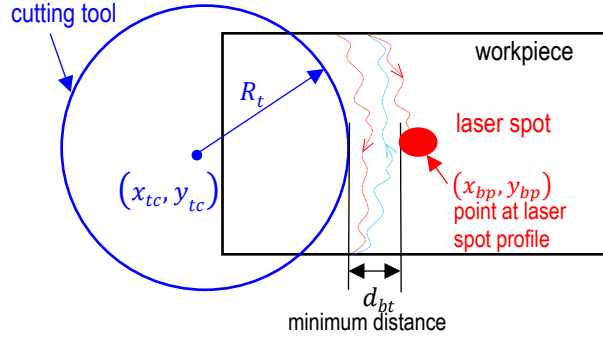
Illustration of the safe distance between laser spot and cutting tool from top view during laser scanning
